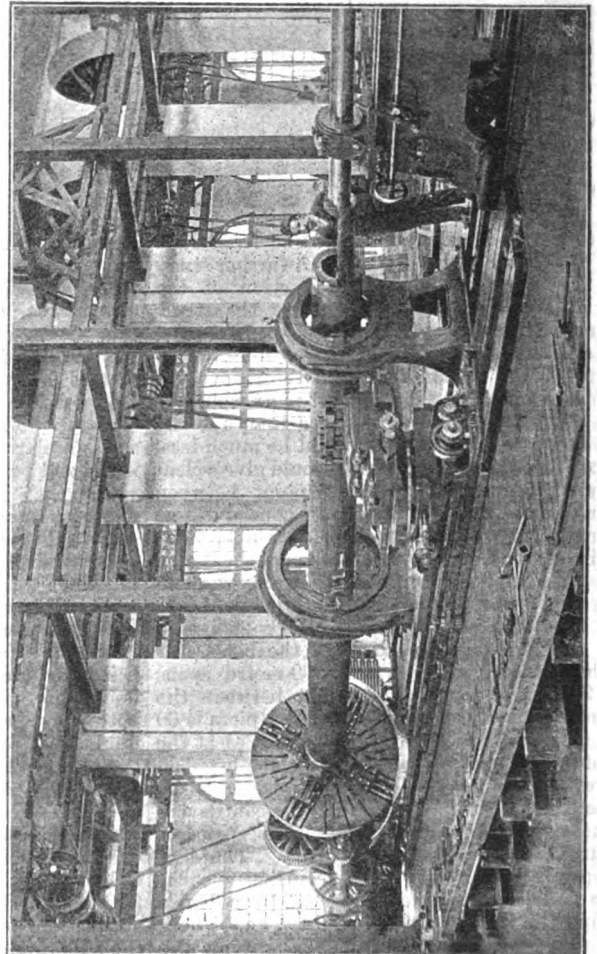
12-IN. GUN TUBE IN LATHE.
